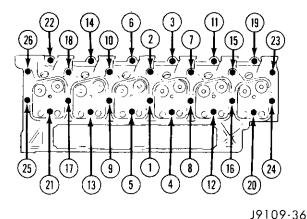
Cylinder Head Bolt Removal Sequence—Cylinder Head Hot
